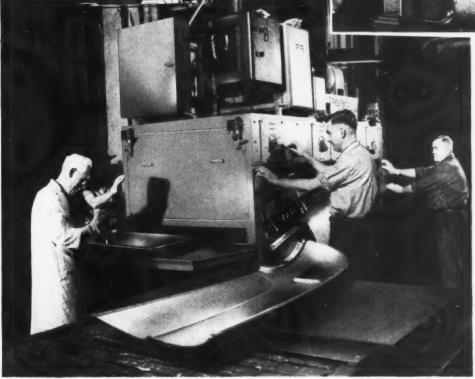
Reinforcements are Joined to Both Right- and Left-hand Rear Fenders on the Special Double-side Resistance Welding Machine Here Shown at the Rate of 250 Fenders per Hour
